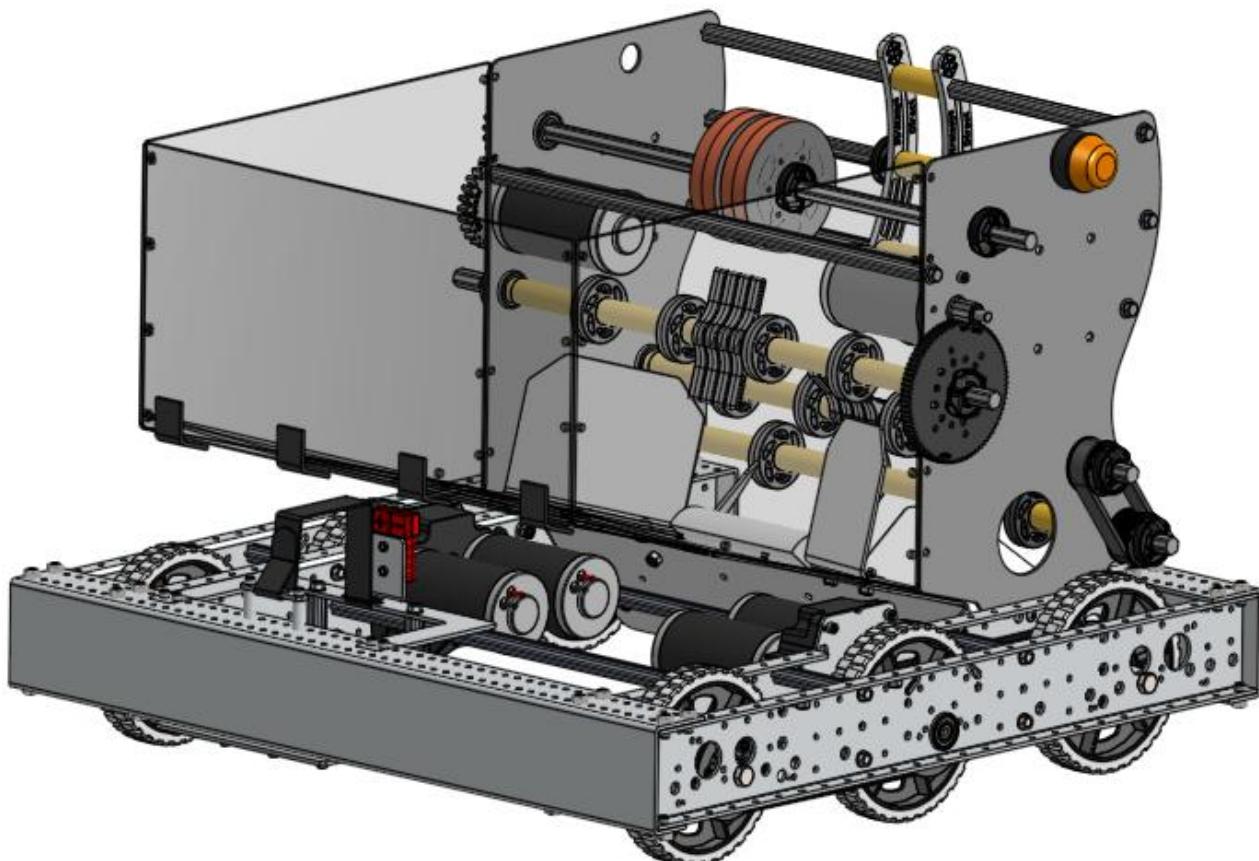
Bolt Hole Locations for Attaching Fuel Mechanism
